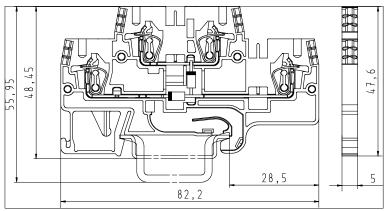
WKFN 2.5 E/35 GO-URL dimensions (mm)
